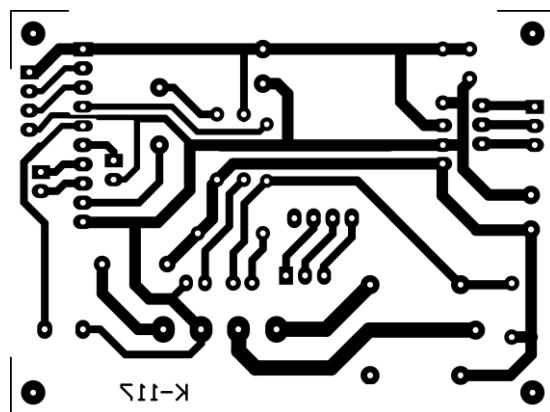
K-111 PCB map (Scale 1:1 Printable on board)
